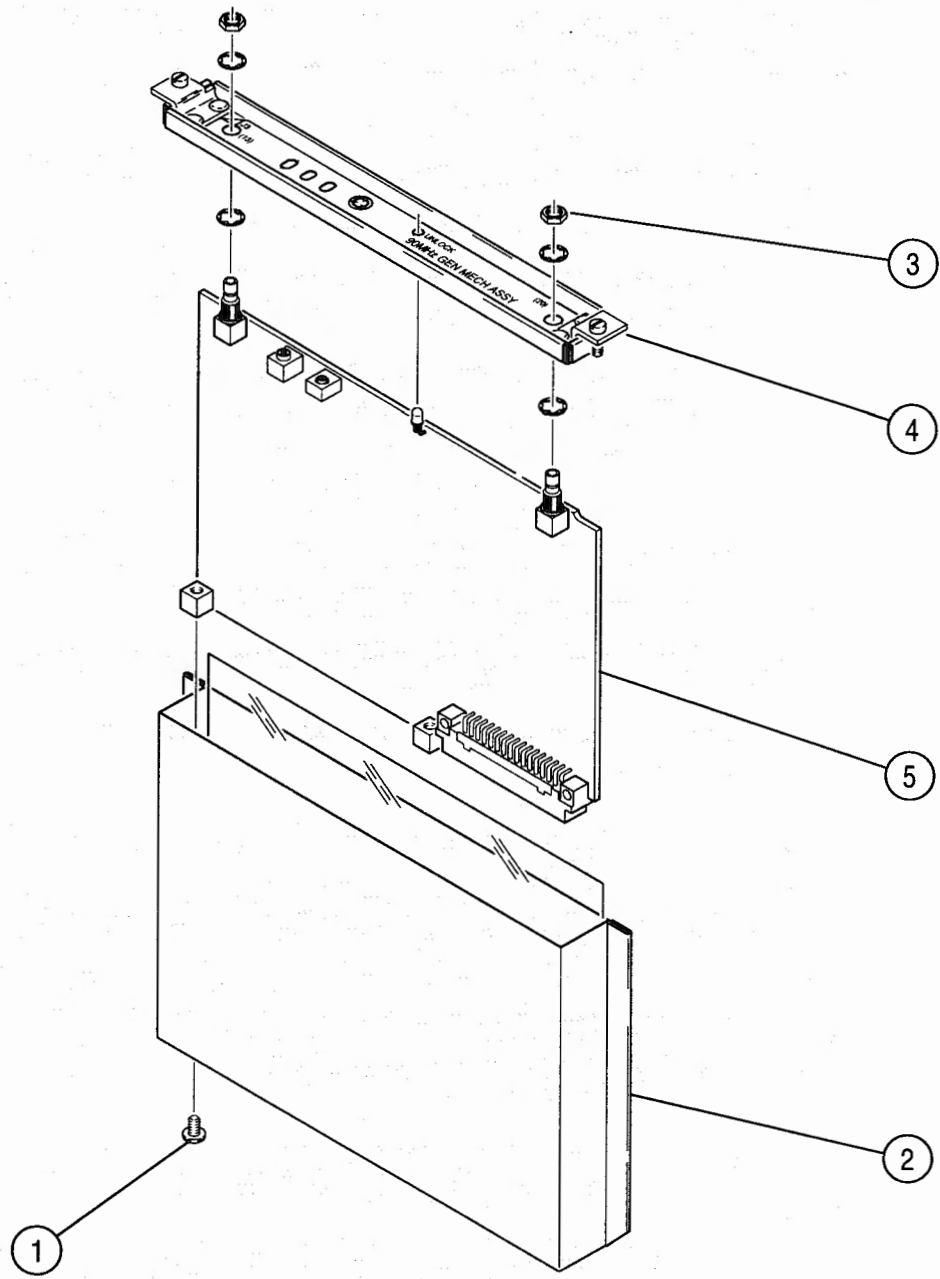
90 MHz Generator PC Board Assembly (78A1A9A1) Removal
